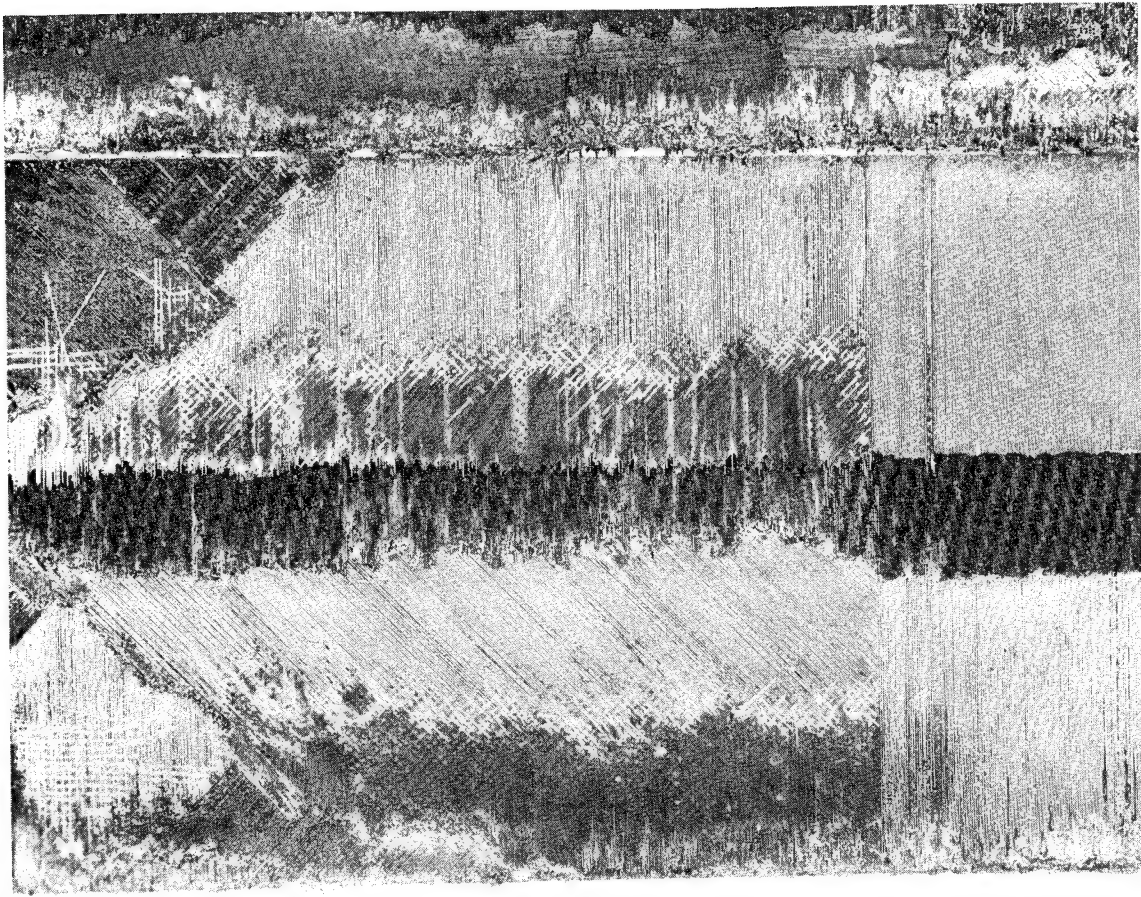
Specimen IIA11C03 - Overall View, 2X Magnification
